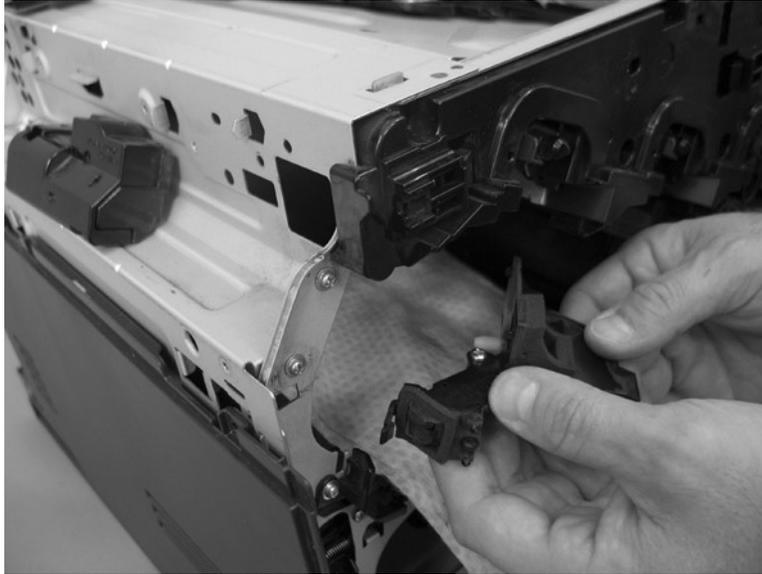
Remove the residual-toner transfer assembly (3 of 4)
